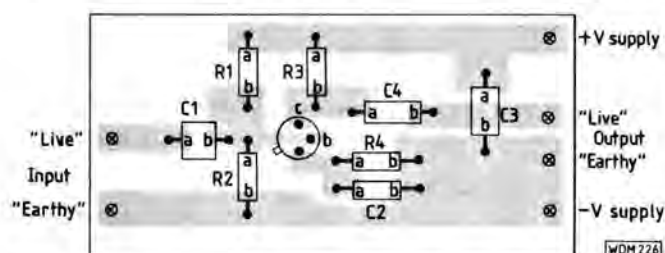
Possible printed circuit board layout for Fig. 3.6
